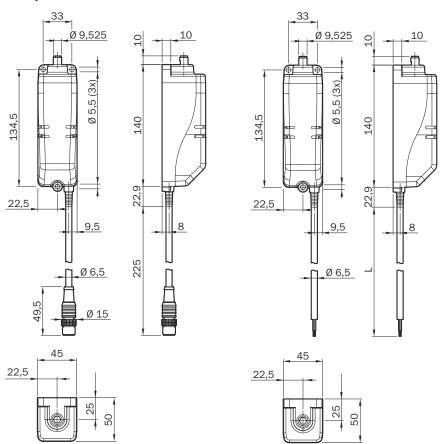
Dimensional drawing of safety switch Figure 26: Dimensional drawing of safety switch with M12 male connector with flying leads
